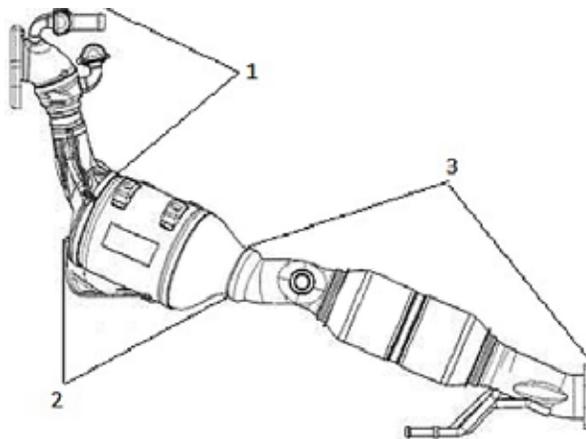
Hot-end horizontal plane and its three main components: (1) front-end sub-assembly, (2) convert cone sub-assembly; (3) outlet sub-assembly
